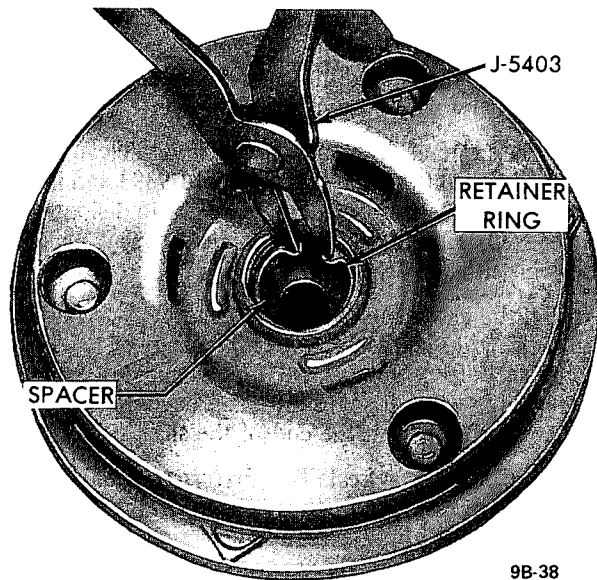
B-61 - Removing or Installing Retainer Ring in Clutch Drive Plate - 6 Cylinder Compressor
